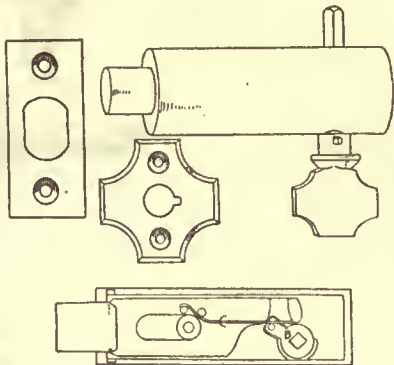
Cylindrical Door-bolt. Ireland Mfg. Co.
